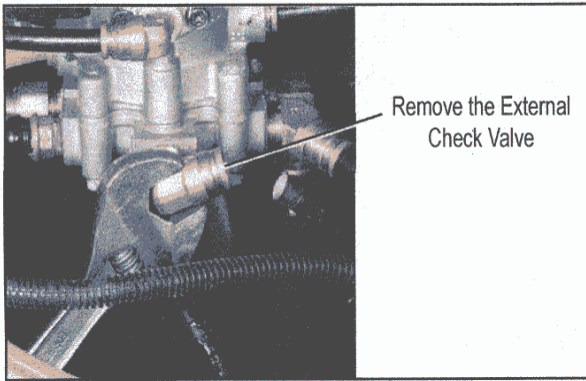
REMOVING THE EXTERNAL CHECK VALVE
